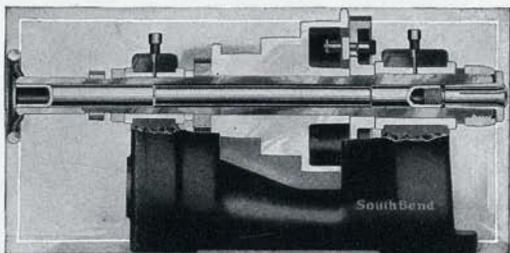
A cross section of Headstock showing Draw-in Collet Chuck
